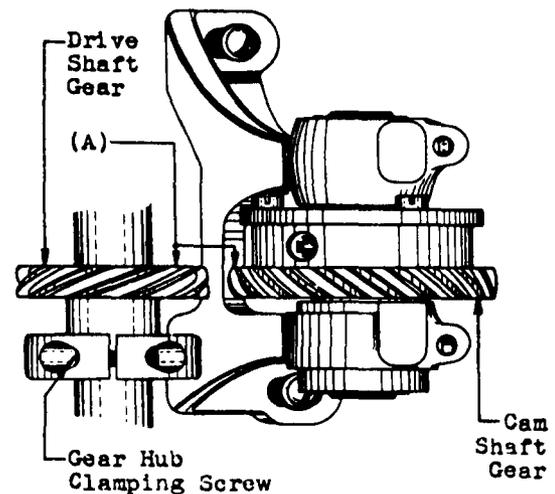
Alignment of Cam Shaft and Vertical Drive Shaft Gears
